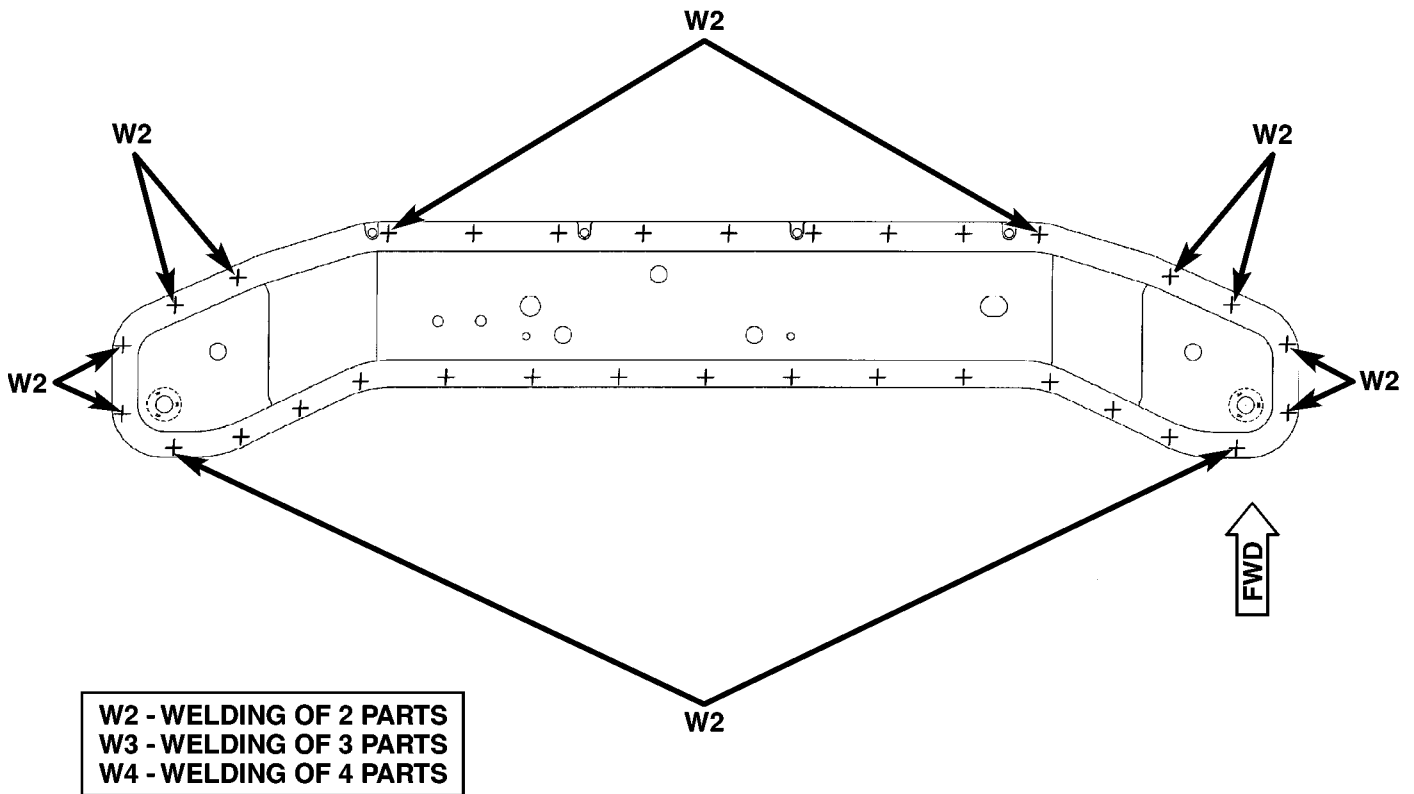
LOWER RADIATOR CROSSMEMBER, UPPER SUPPORT TO LOWER RADIATOR CROSSMEMBER LOWER SUPPORT 80c622b0
